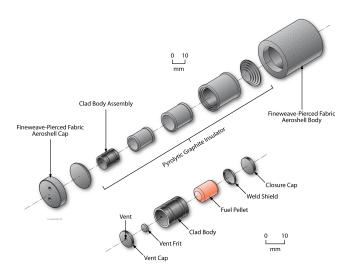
Exploded view of a LWRHU. (DOE/INL)
